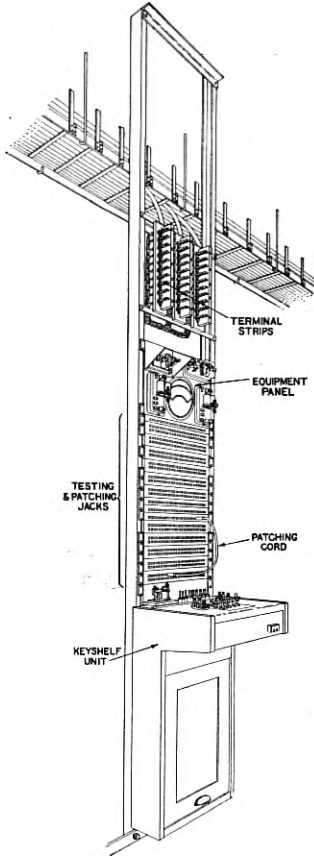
Typical General Assembly of Panel Mounted Test Board
